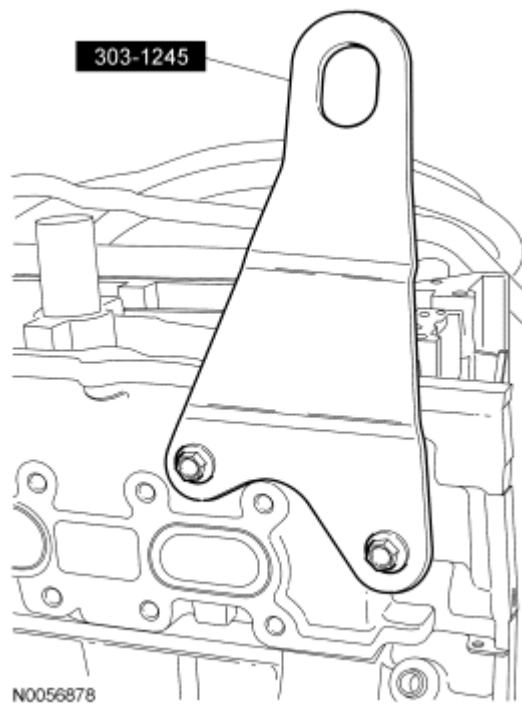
Installing Special Tool (303-1245) On LH Cylinder Head
